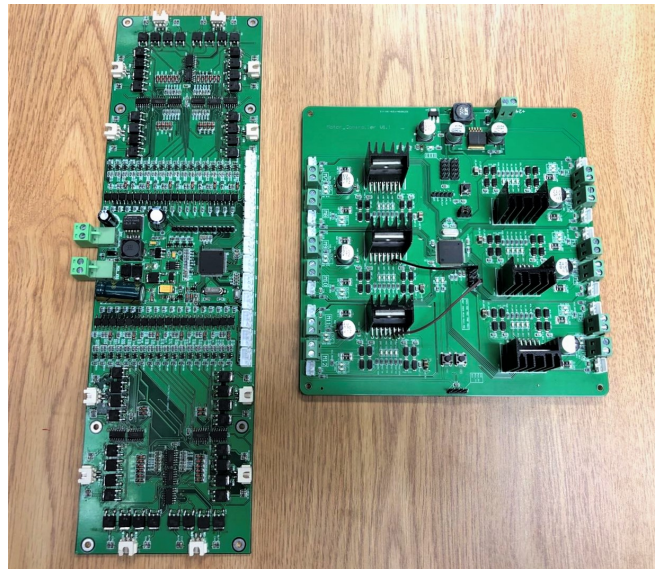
First version of the PCB (left) and second version of the PCB (right).
